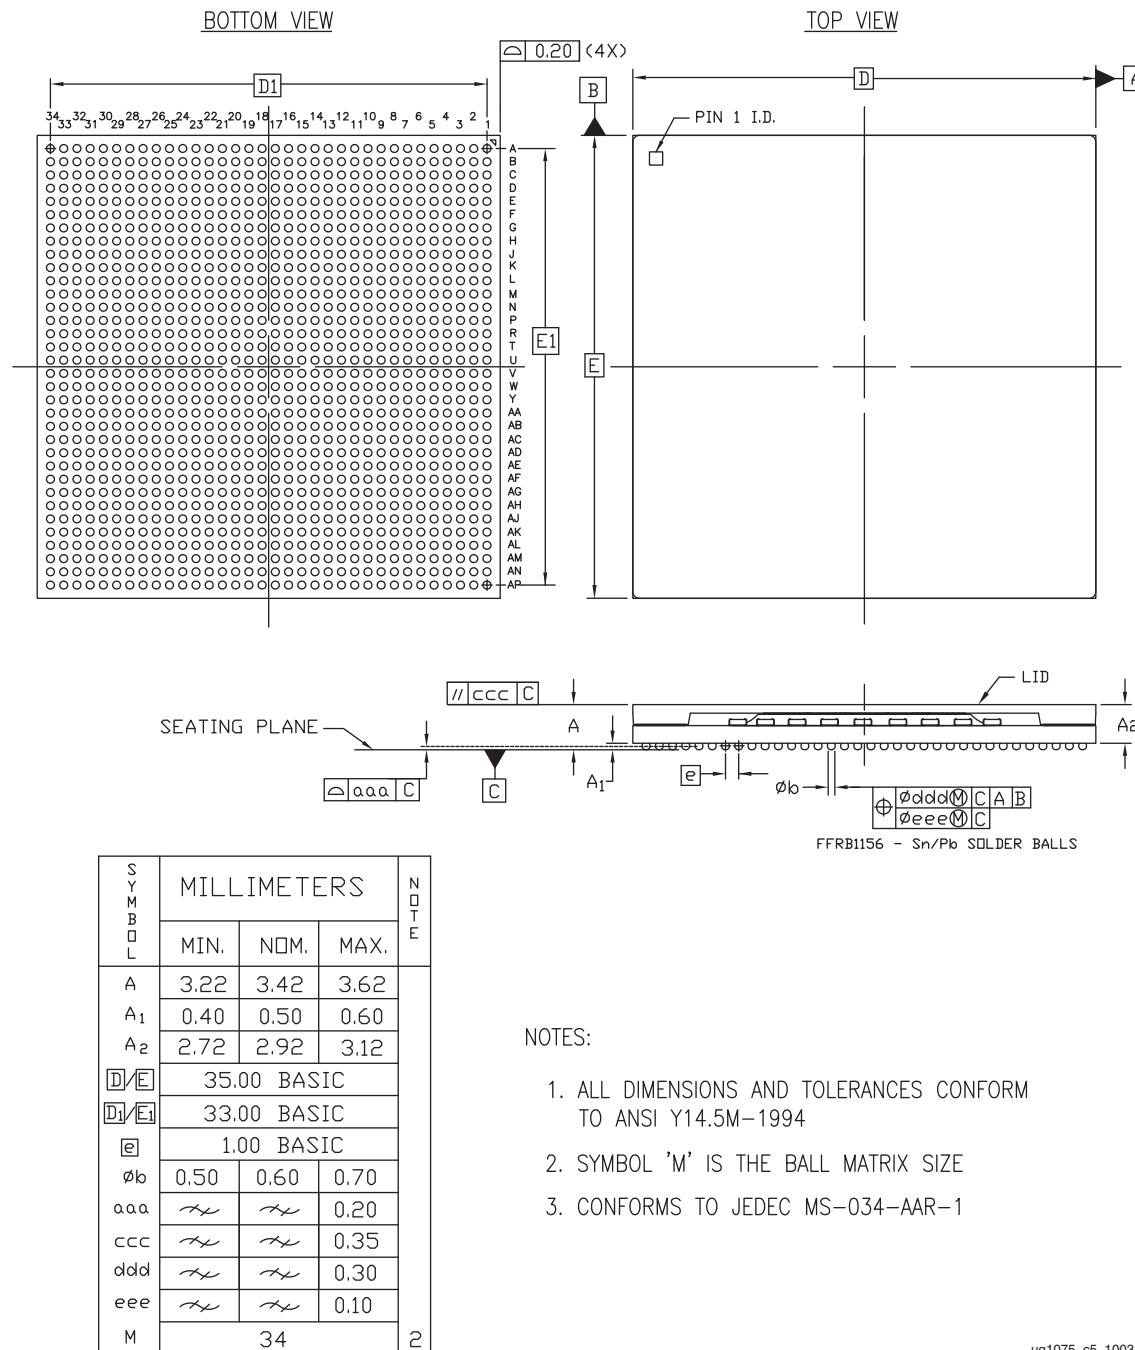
Package Dimensions for FFRB1156 (XQZU9EG and XQZU15EG)
